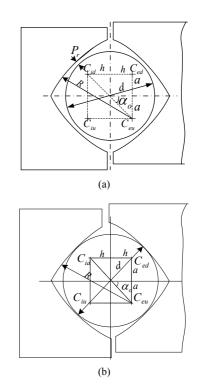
(a) Cross section of a slewing bearing with positive clearance; (b) Cross section of a slewing bearing with zero or negative clearance.
